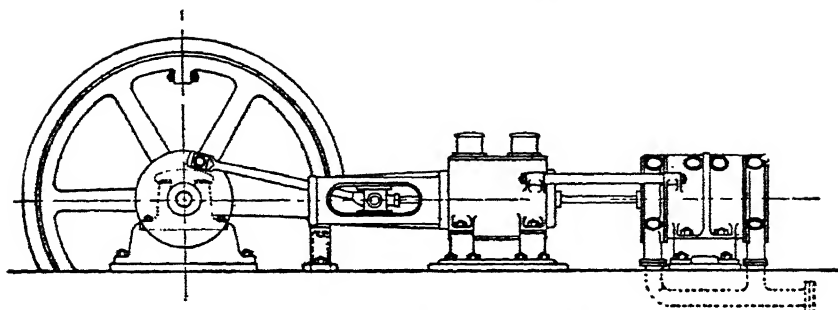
ELEVATION OF STEAM-DRIVEN AIR COMPRESSOR
